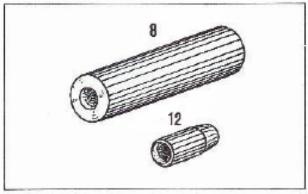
Exit pinion oil seal. With protective tool #12 covering the spline, tap the seal into the housing using the driving sleeve tool #8 to avoid damaging the seal. Using the driving sleeve #8 insert the oil seals for the pedal shaft and the right and left crankshaft ends.
